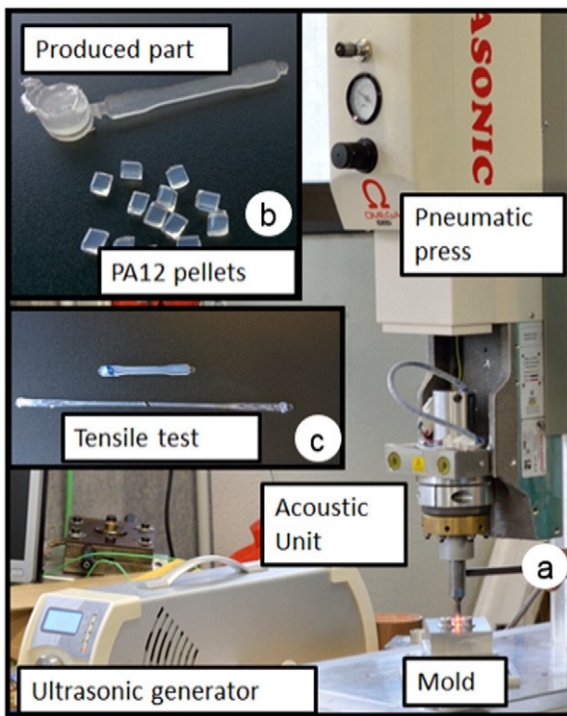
Experimental setup: a) Ultrasonic molding equipment, b) Raw material and final part and c) Tensile tests.
